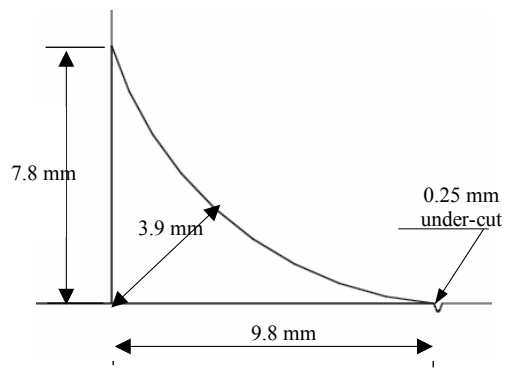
Case 3 weld dimensions used in finite element model for nominal fillet weld 6.4 mm.
